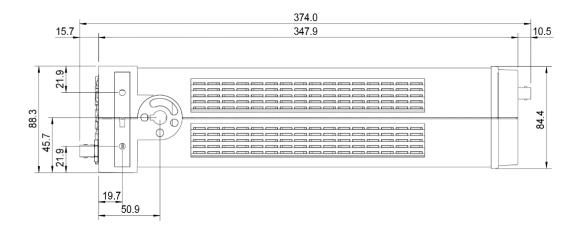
Dimensions (side view, without handle and bumper, in millimeters, nominal)
